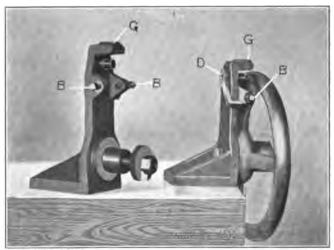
Drill Jig for Holes in Rim of Hand-wheel
